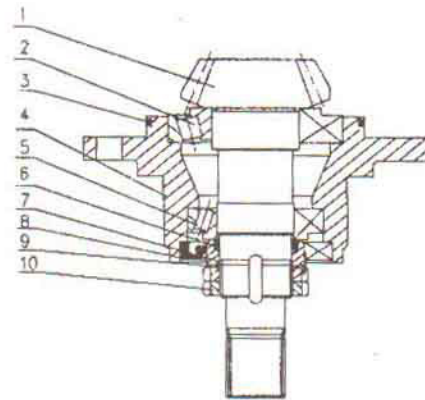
Preload of front central transmission drive bevel gear bearing
